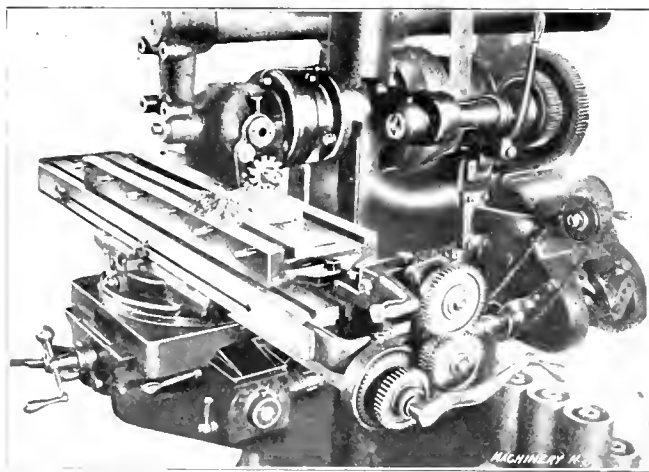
Change Gear Attachment for Spacing in Rack Cutting and Similar Operations.
